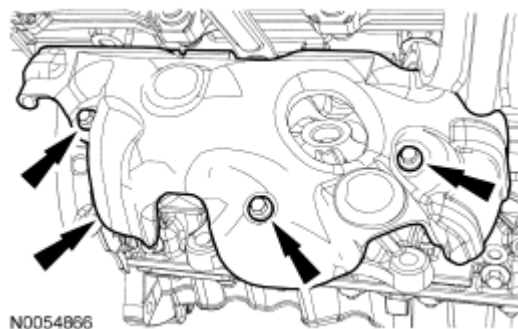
Locating RH Exhaust Manifold Heat Shield & Nuts
